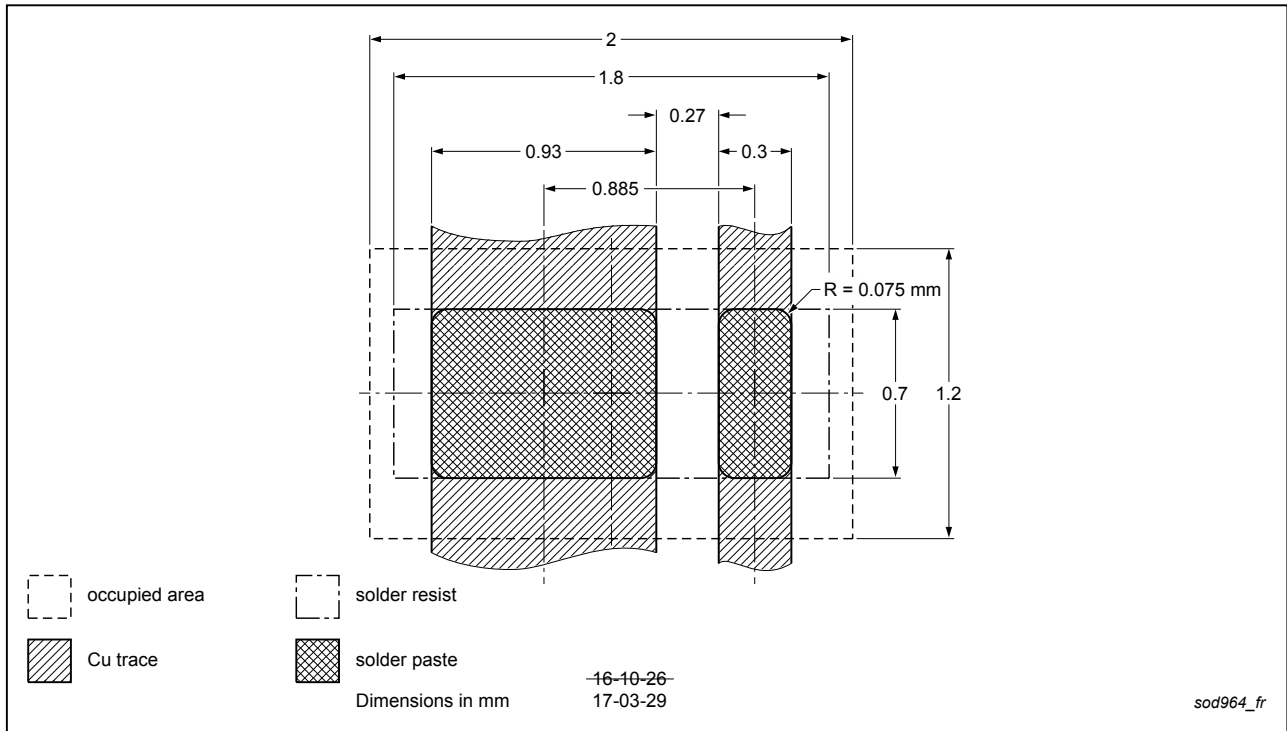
Reflow soldering footprint for DSN1608-2 (SOD964)
